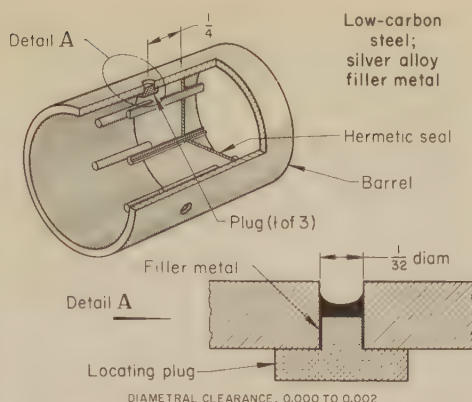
Connector assembly with locating plugs that were torch brazed in position one at a time to avoid heat damage to a hermetic seal (Example 586)
